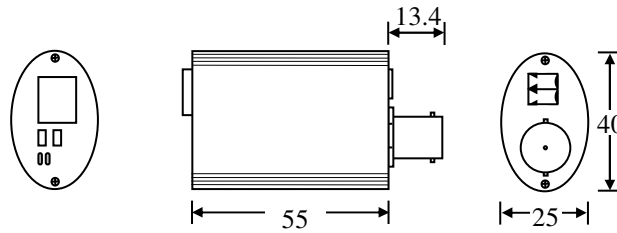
OSD8220 MOUNTING DIMENSIONS
